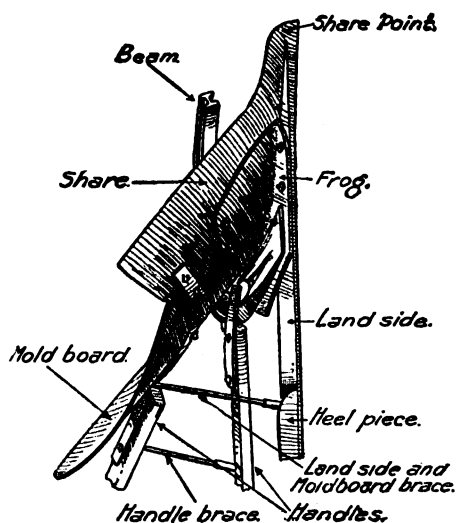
Bottom view of moldboard plow indicating the essential working parts
